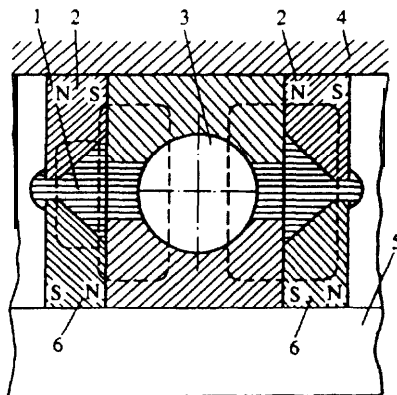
Schematic diagram of the rolling bearing lubricated by a magnetic fluid [27]: 1, magnetic fluid; 2, 6, magnets; 3, ball; 4, 5, movable and immovable pieces.
